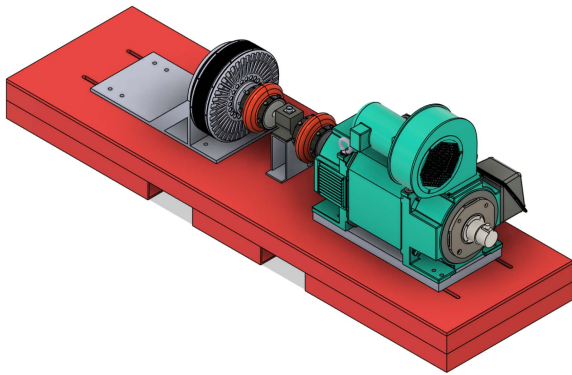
CAD model of fully assembled, modified Dynamometer test stand at NCREPT used for the initial testing of the silicon carbide traction drive.
